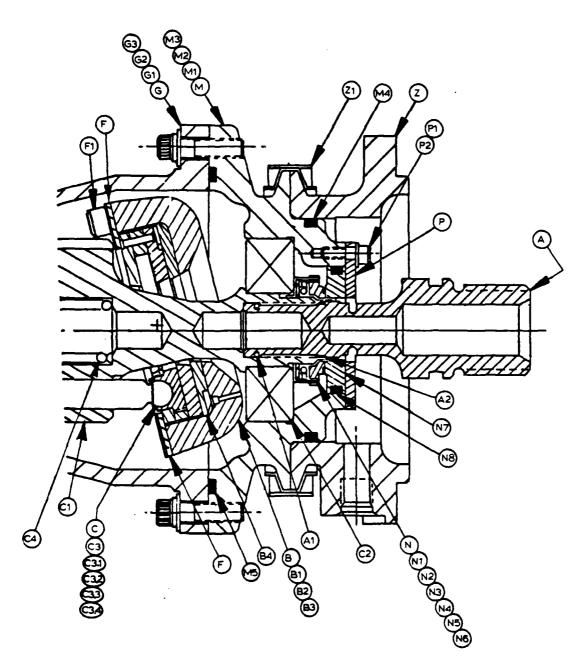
Side View - Drive Shaft End of Pump Showing Coupling Shaft, Shaft Seal, and Yoke and Piston Detail
